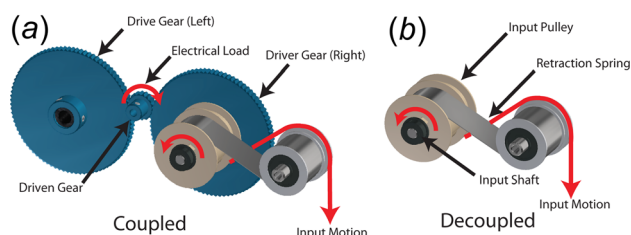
Schematic showing internal components engaged in each state. (a) Coupled state. The input shaft is engaged with the remainder of the system. Engaged components include both left and right drive gears, driven gear, generator, input shaft, input pulley, and the retraction spring. (b) Decoupled state. The input shaft is not mechanically engaged with the remainder of the gear train due to the overrun of the roller clutch. Engaged components include input shaft, input pulley, and the retraction spring.
